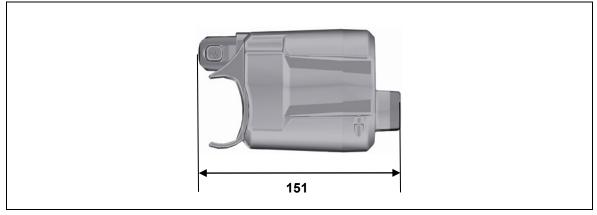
Dimensions of the MC10 control unit, side view (in mm)
